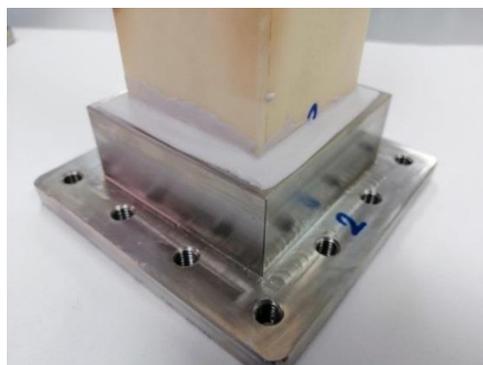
Prototype assembly of the squared sectioned alumina tube and the steel flange with a white ceramic cement, before being submitted to mechanical stability tests at high temperature.
